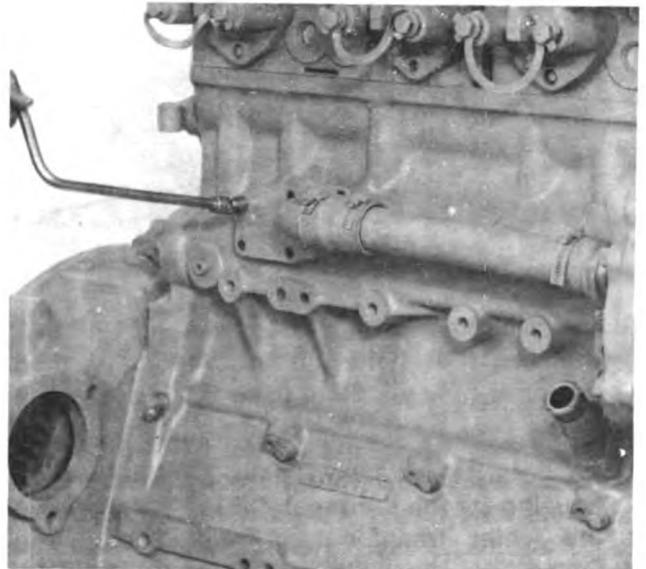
Remove The Capscrews Holding The Water Connection.
